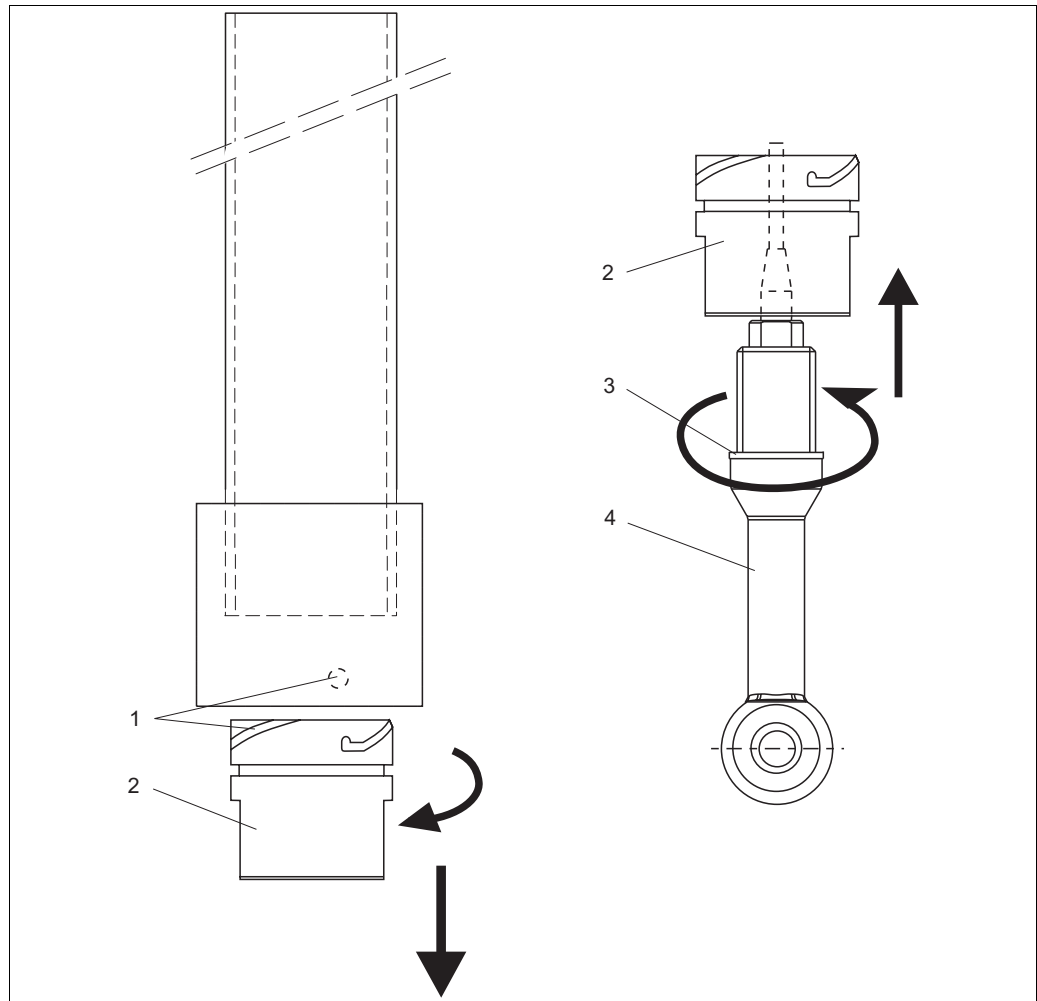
Removal of the sensor holder and mounting of the sensor CLS50
